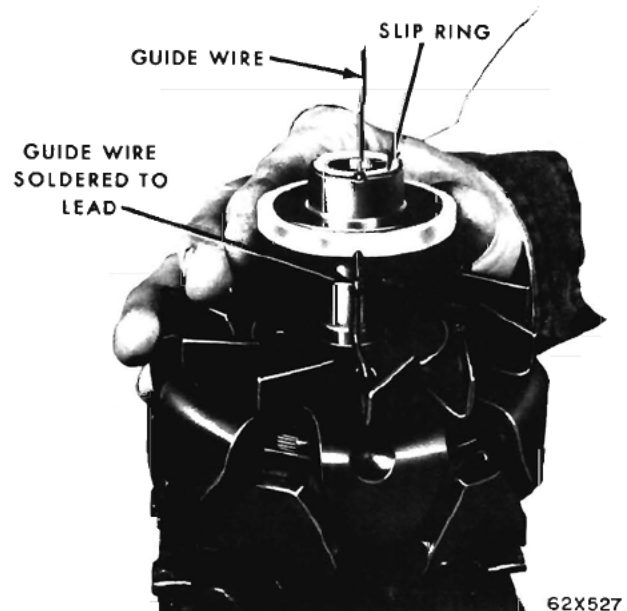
Aligning Slip Ring with Field Wire and Guide Wire
